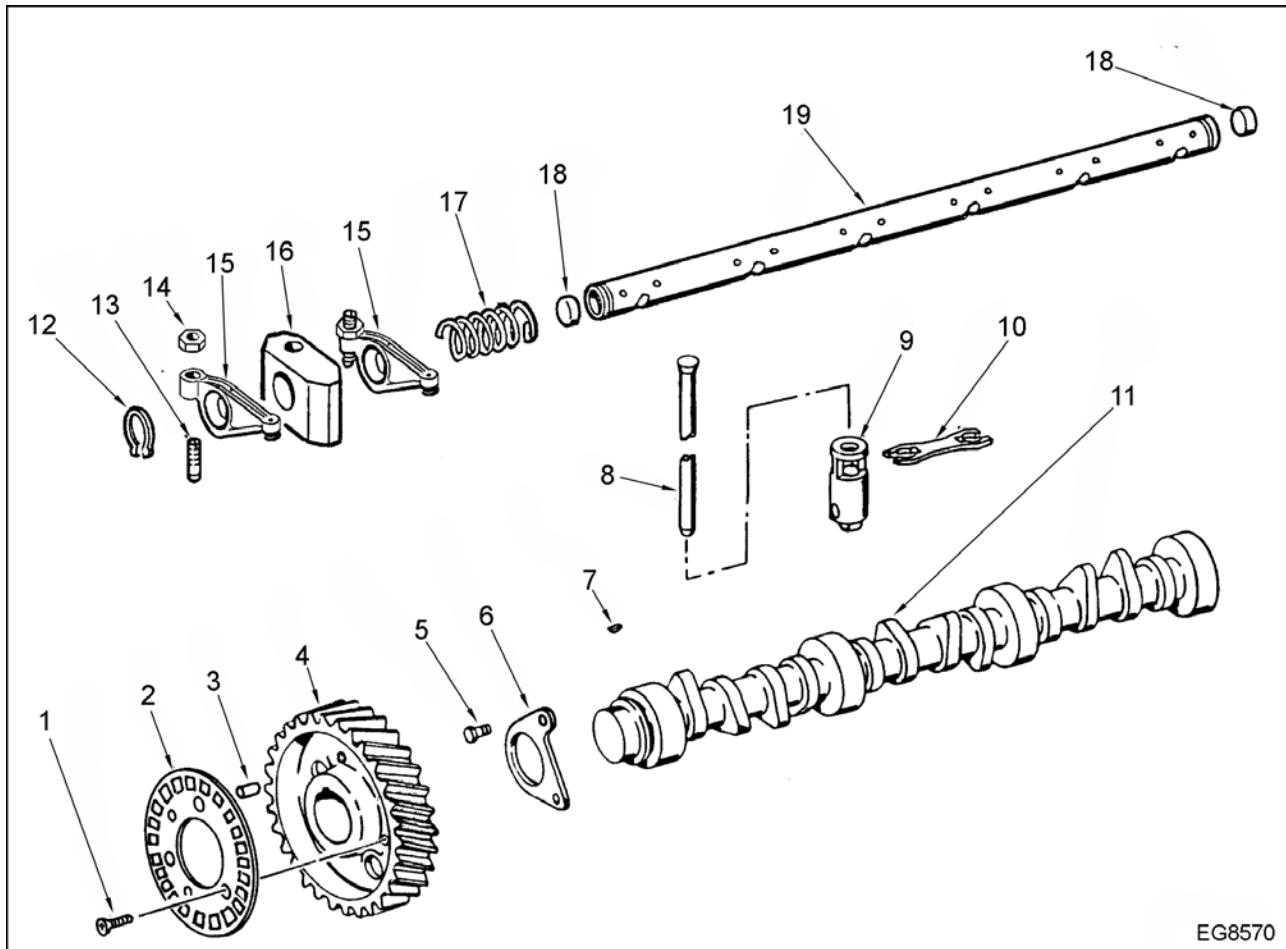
Exploded View Of Rocker Arm Assembly, Camshaft Assembly, Tappets, and Push Rods
